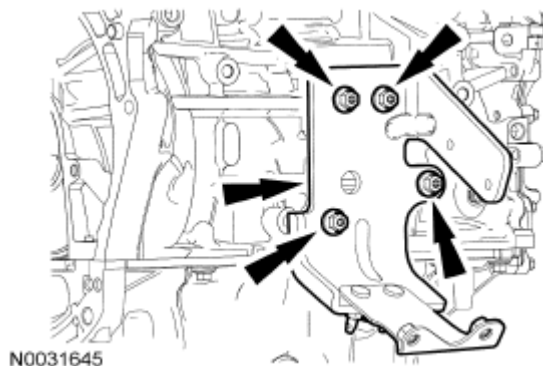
Locating Bolts & Halfshaft Support Bracket
